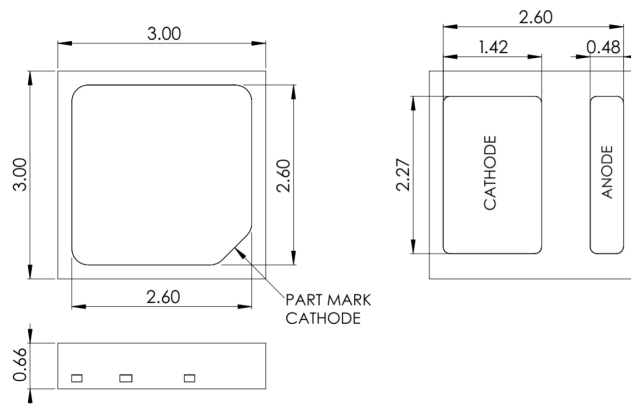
Mechanical Drawing for LUXEON 3030 2D Square LES. All dimensions are in millimeters.
